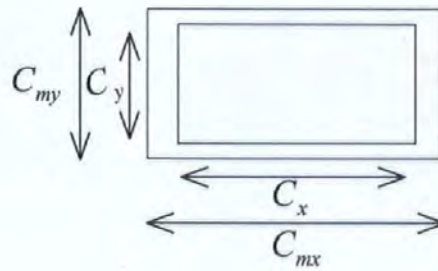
Cross-section of enamelled copper wire. The copper and the enamel coating dimensions are shown.
